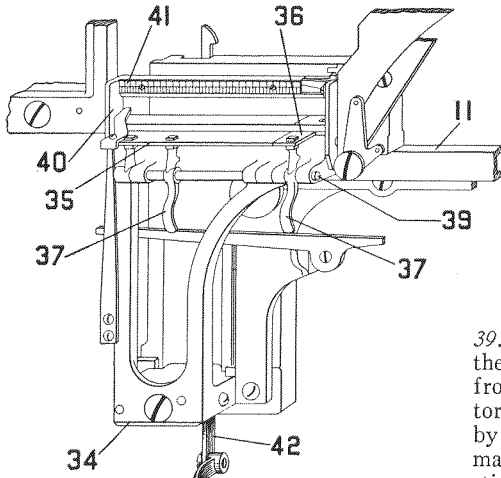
View of the assembler elevator or assembler stick, showing its connection with the keyboard and the means by which the assembler elevator is raised. The assembler elevator is composed of an open casting 34. In the upper part of this casting are mounted two shelves, or sliding plates. The one 35 is much longer than the short 36. These shelves are each operated by two levers 37, which are mounted on a pivot 39. On the upper side of the assembler there is a hinged gate 40 having upon its front side a scale 41. The assembler elevator is connected to a shaft on the keyboard by a link 42 through the lever 43 to the main shaft 44. The weight of the assembler stick is partially balanced by a spring 45.
